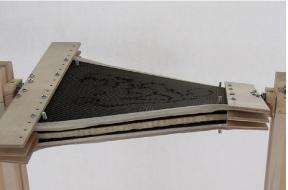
| Mould prepared for a threedimensional warped piece
